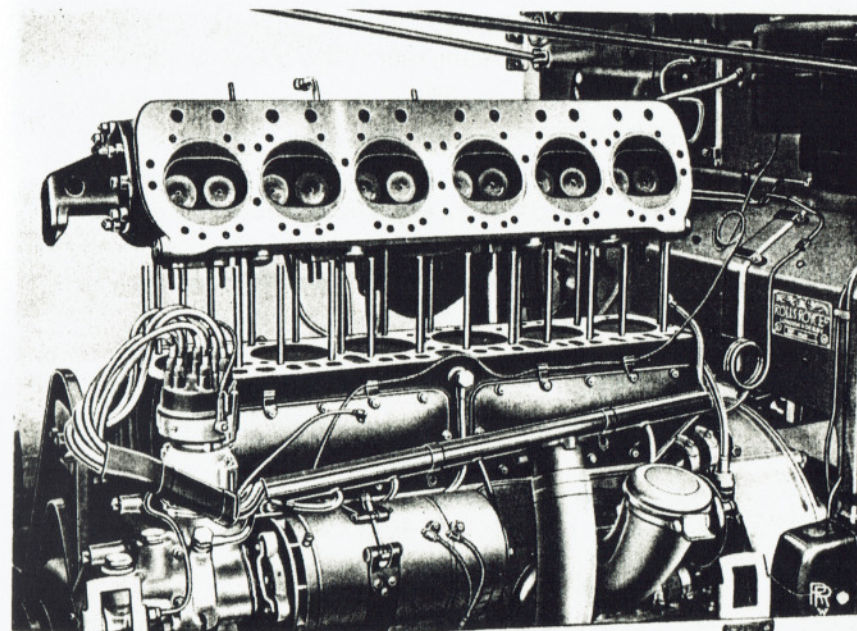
CYLINDER HEAD REMOVED FOR DECARBONISING.
